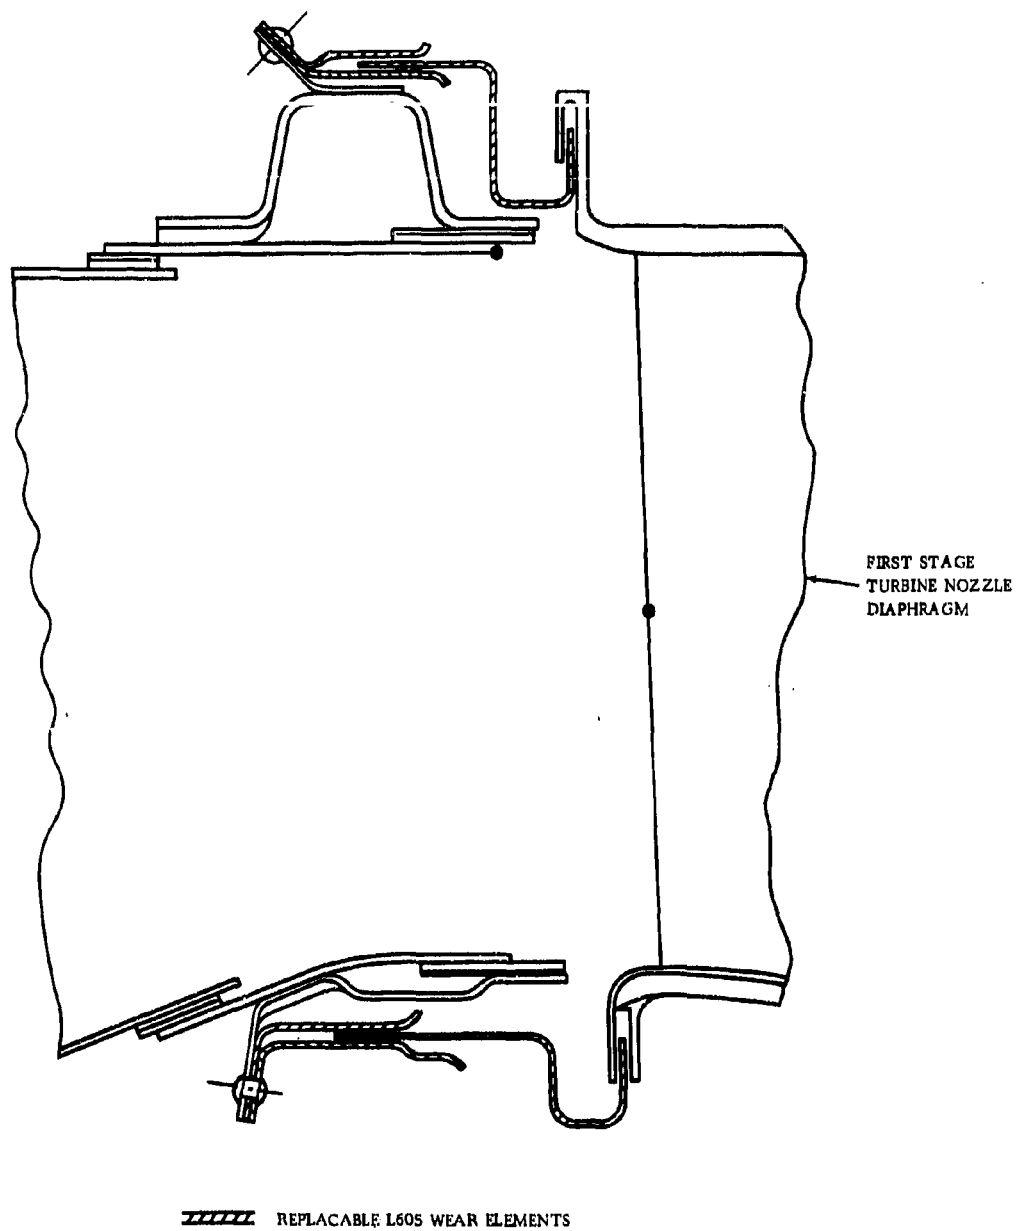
GE4 COMBUSTOR AFT SEAL ARRANGEMENT
